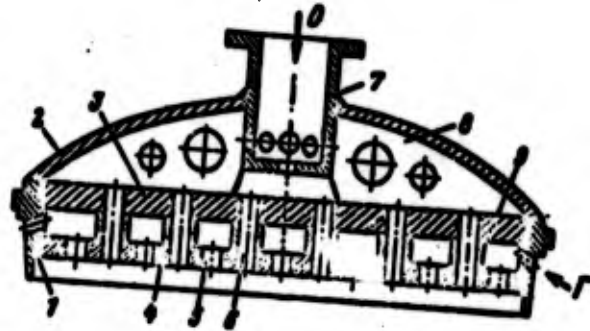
Design of a head with a flat base: 1 - power ring; 2 - upper base; 3 - middle base; 4 - fire base; 5 - fuel injector; 6 - oxidizer injector; 7 - pipe; 8 - stiffener; 9 - distance bushing.
